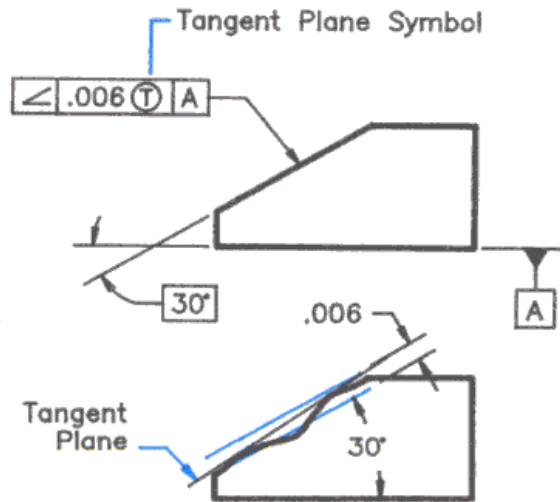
Angularity may be specified to control the plane that is tangent to surface high points.
